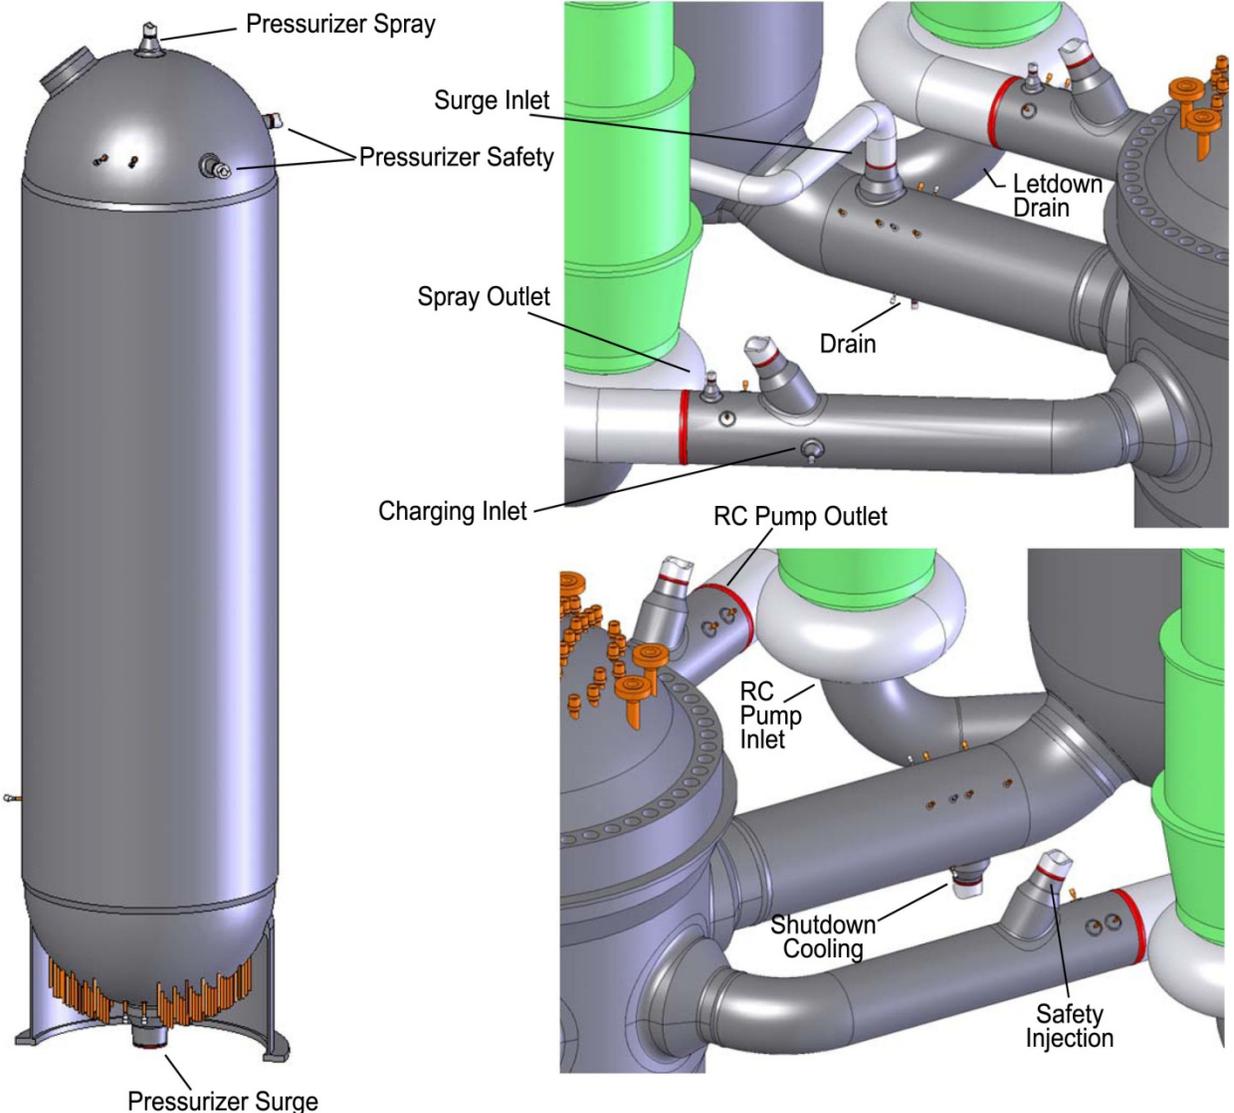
Typical Locations of Alloy 82/182 Butt Welds in CE Design Plants
